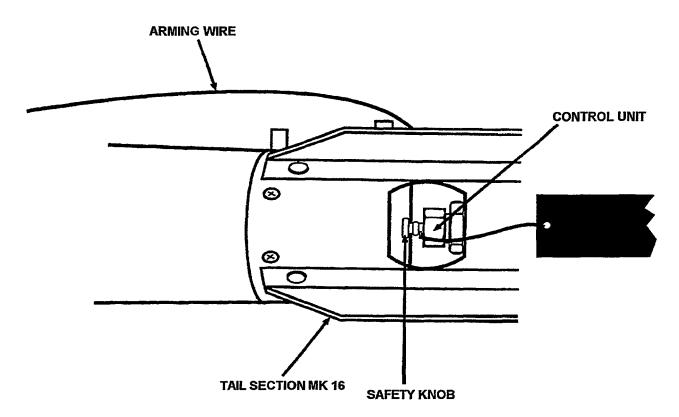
E. Arming Wire Inserted Through Control Unit and Safety Knob Installed on Control Unit
